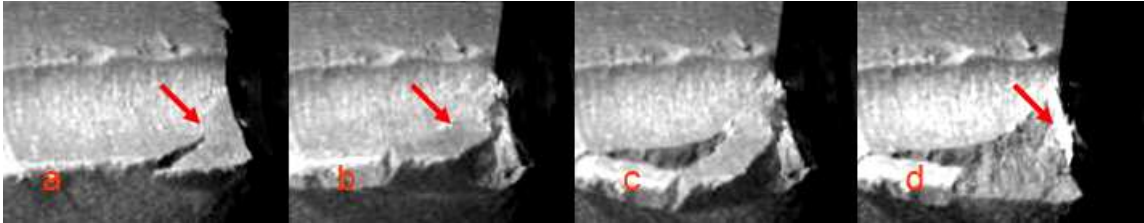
Chip forming/crack extension II in the initial stage of cutting
